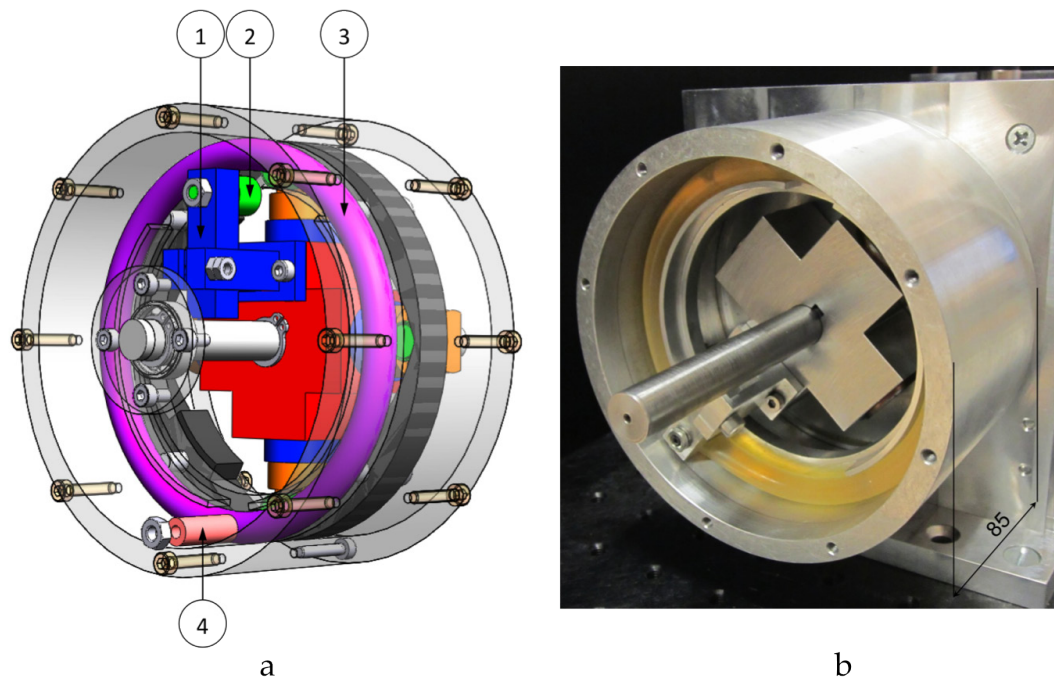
Damping module. (a) 3D CAD drawing of torsional damping module. 1: fluid mover, 2: cam follower roller, 3: silicone tube, 4: pressure drop regulator, (b) View of the prototype highlighting the components of the torsional damping module with thickness dimension overlaid (mm).
